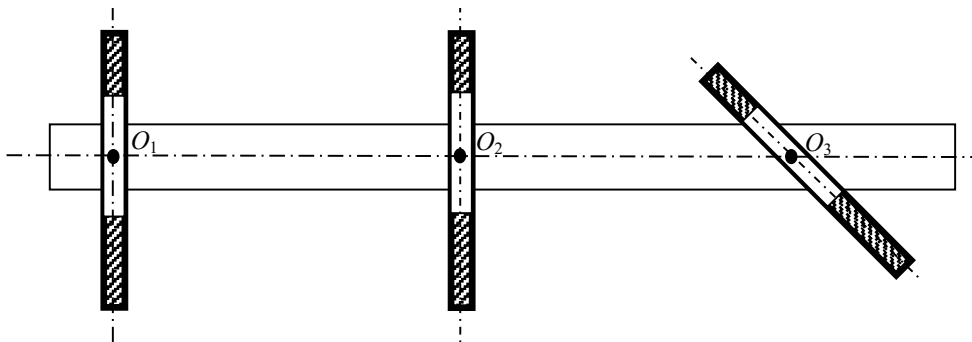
Three bearing seats with the centres of symmetry marked according to the typical measurements conducted by a repair shop, but with skew bearing seat 3 forming a cylindrical surface
